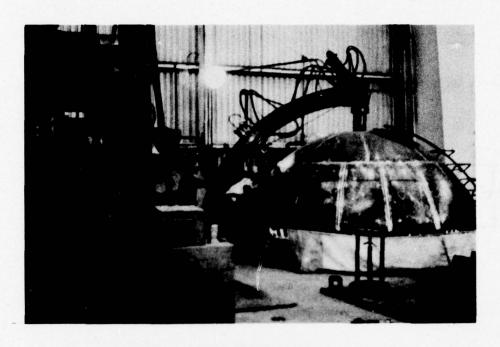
Welding Fitup for Inner Layers of Heads and Cans
